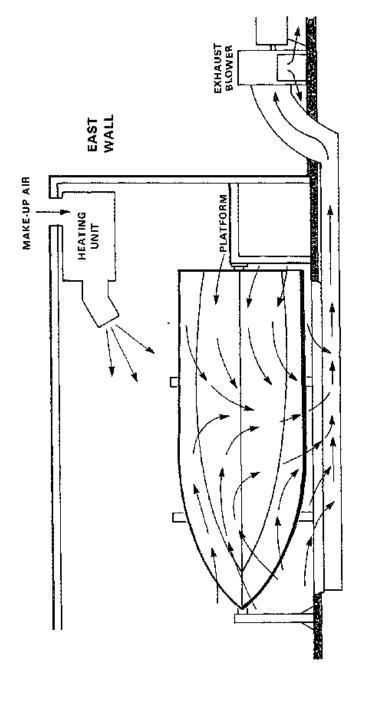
AIR FLOW THROUGH MOLD #2, 44' HULL
